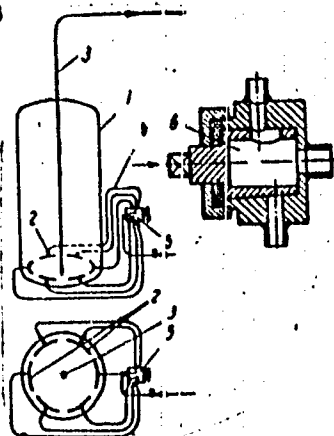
1 - cylindrical chamber; 2 - sectors of porous duct; 3 - inlet end of material duct; 4 - inlet tube; 5 - common compressed air distributor; 6 - plug.
